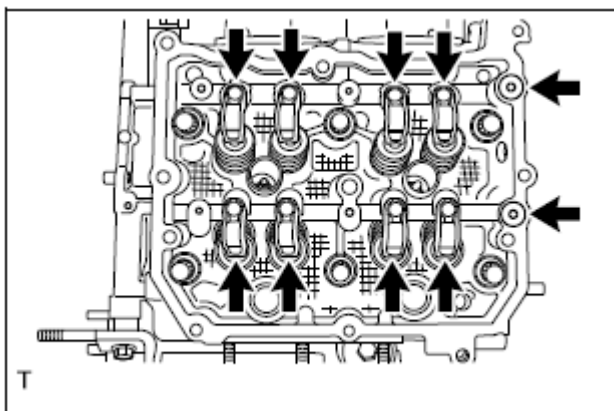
Identifying Cylinder Head Sub-Assembly Valve Rocker Arm Sub-Assembly No. 1 And O-Ring
